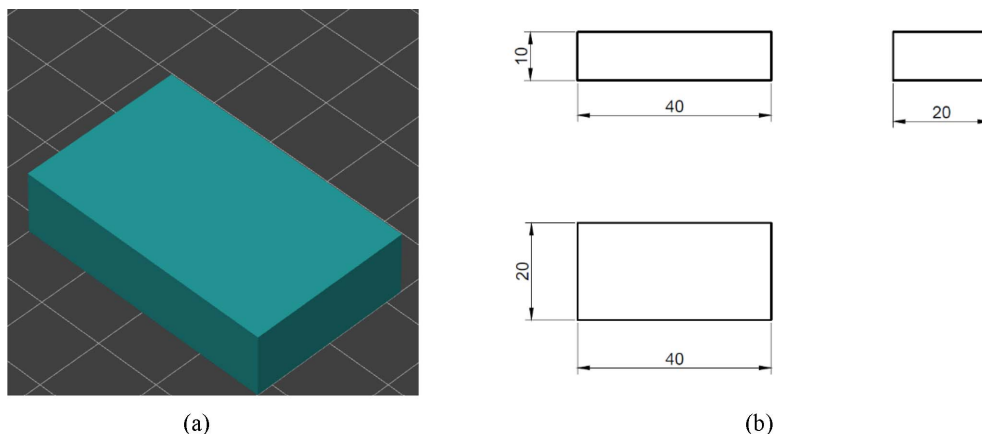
(a) Specimen CAD Model, (b) Specimen Dimensions.
